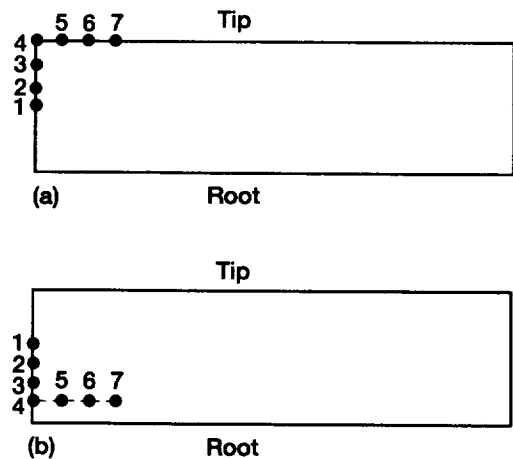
Edge contact caused by $\Delta\gamma = 3$ arc min and $\Delta\lambda_p = -4$ arc min: (a) pinion tooth surface, (b) gear tooth surface.
